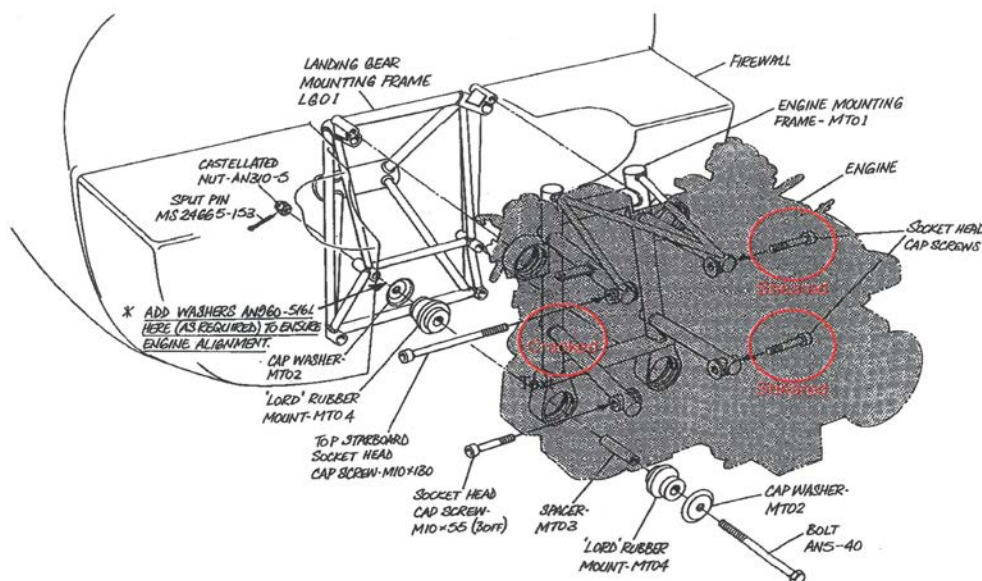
This sketch shows the engine installation in the Europa aircraft, though is fairly typical of a Rotax 9 Series engine fit: notice that the engine mount frame is directly attached to the engine, the frame itself being rubber mounted, in this case to the landing gear frame, though more usually to the firewall. It is essential that these engine mounting bolts are checked very regularly for security, if they should become loose the bolt will fail due to bending fatigue. Should an engine mount bolt be found loose it must be removed, the mating faces between the engine mounting frame and the engine thoroughly cleaned, inspected and reprotected and the bolt replaced with a new item in accordance with manufacturer's assembly instructions.
